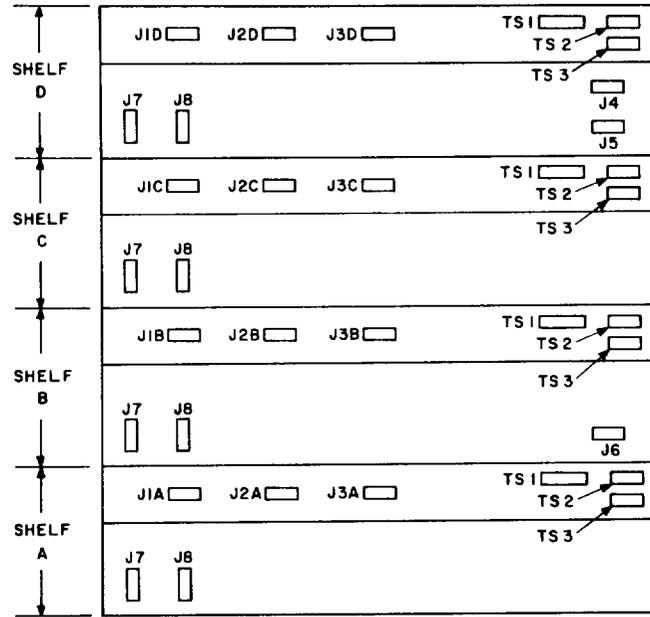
Rear View of 4-Shelf T1DM Assembly (J70177AE)
